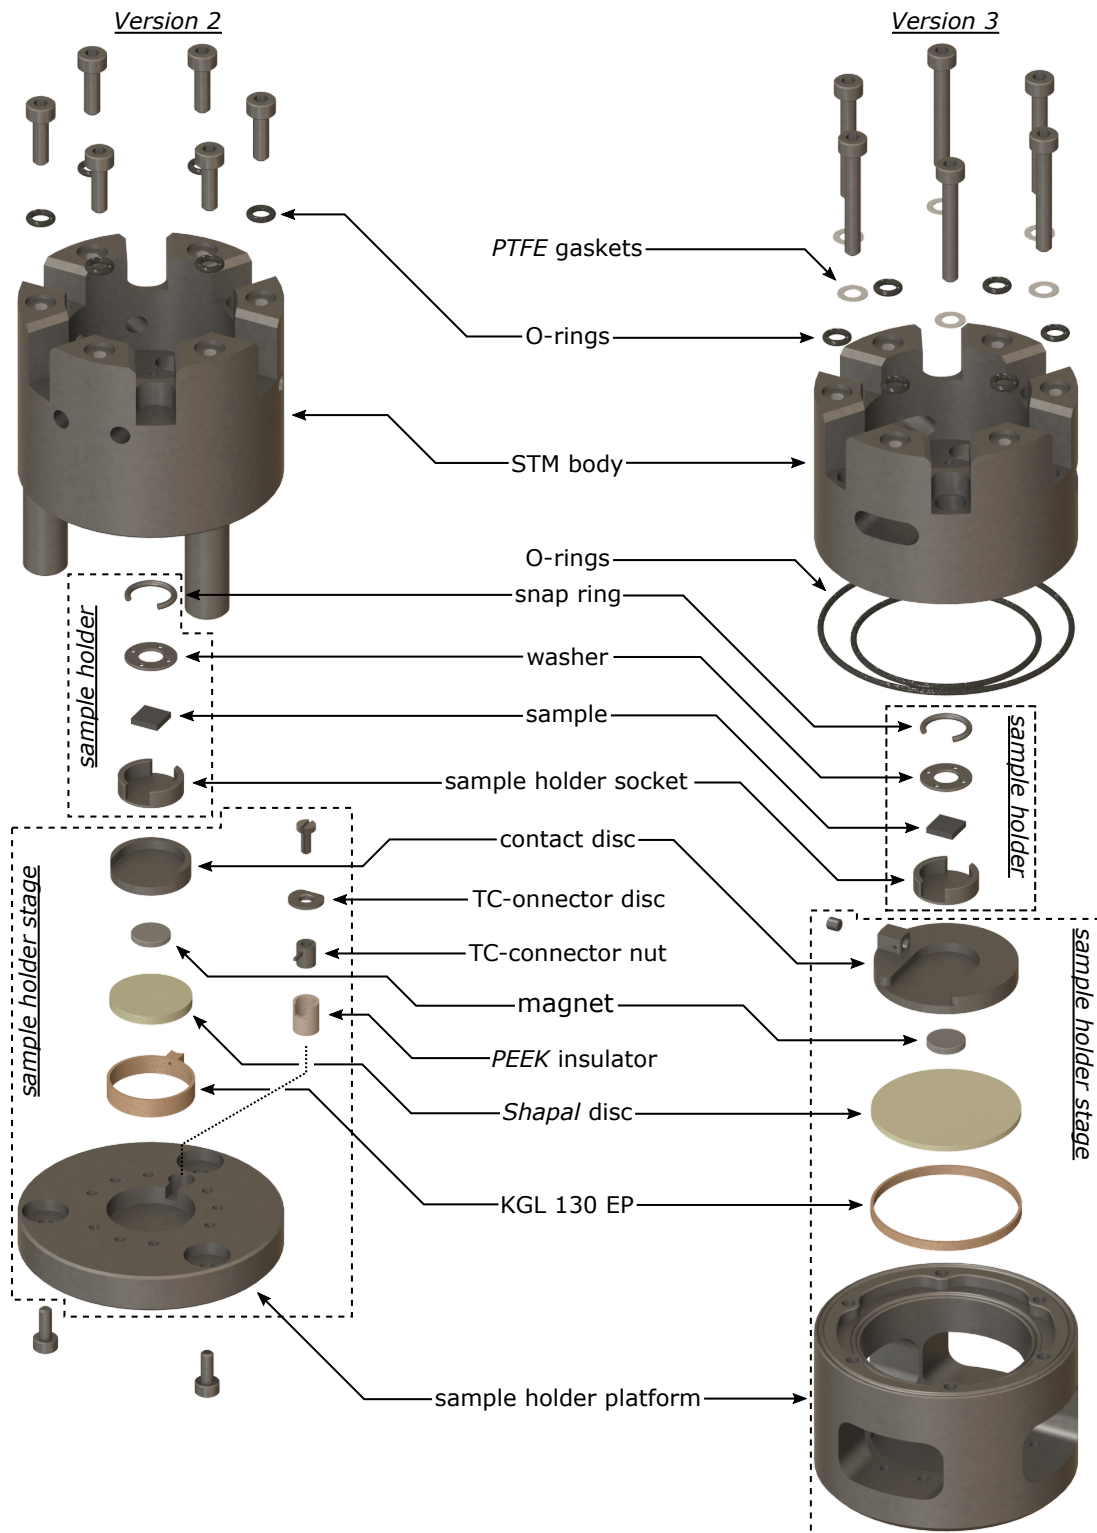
Exploded views of version 2 and 3 of the outer STM with sample holder assemblies.
